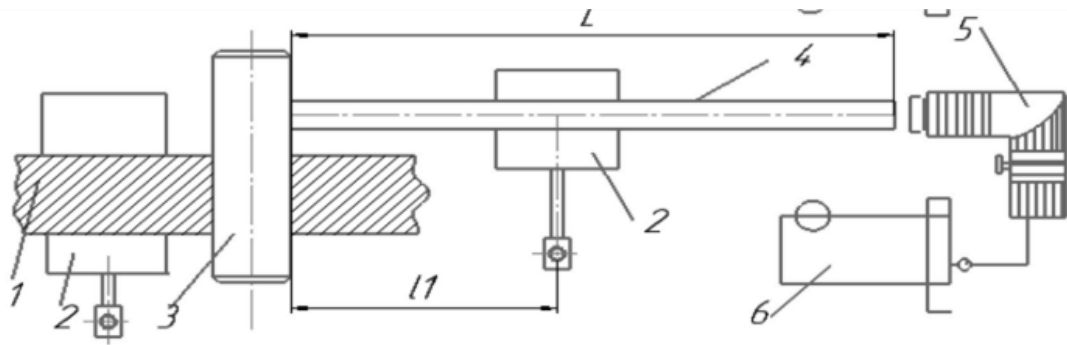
Loading of the press-fit joint using a waveguide perpendicular to the shaft
